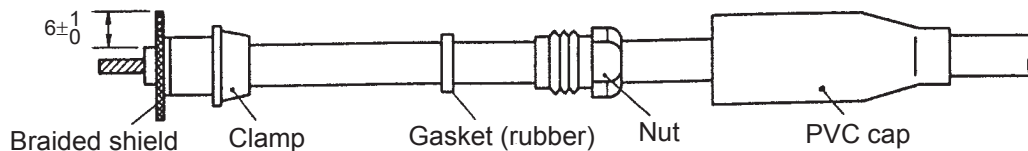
Coaxial Cable Parts Incorporation and Shield Treatment
